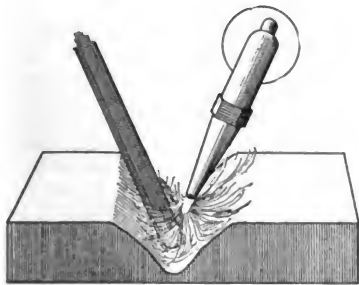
KEEP THE ROD IN CONTACT WITH WELD AT ALL TIMES WHILE WORKING
